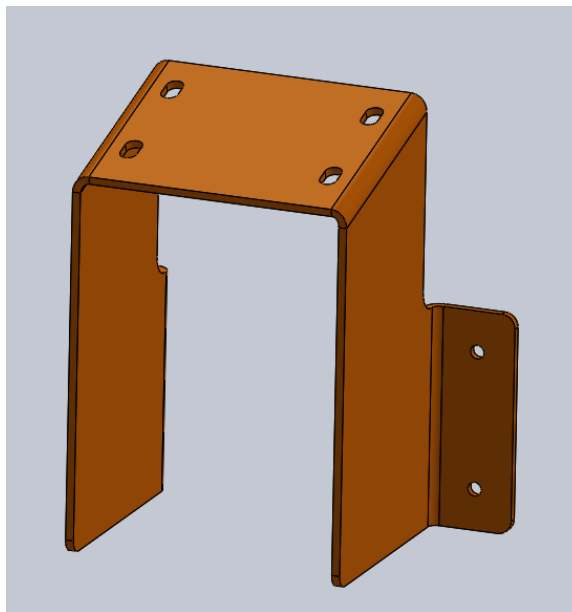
Bracket Rear for preliminary design, highlighting deflection.
